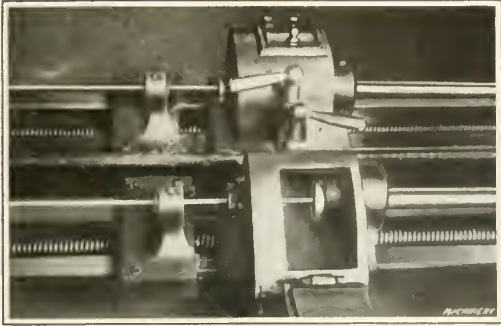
Enlarged View of Drilling Machine showing Carriages
